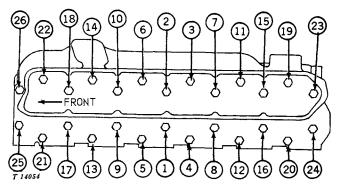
Proper Sequence for Tightening Cylinder Head Cap Screws
